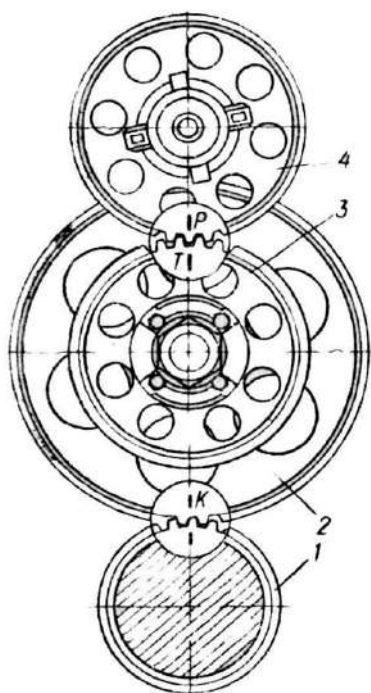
Installation scheme of timing gears of diesels of YAMZ type:
